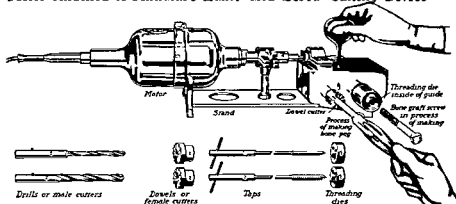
Universal motor attached to lathe, which is able to form, with its cutting tools, pegs and screws of various sizes. *b*, peg-shaper; *c*, screw-shaper. By courtesy of Kny-Scheerer Company.
